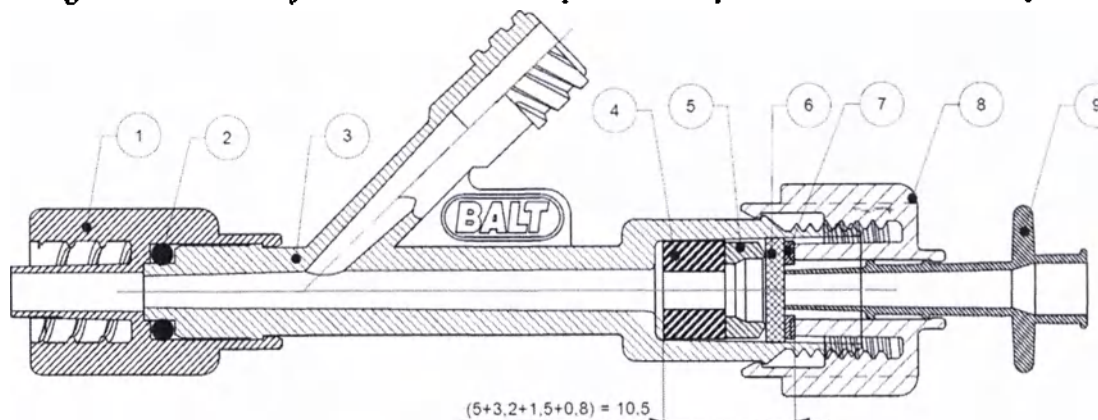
Device structure: RYVA.LUER Sterile Disposable Y-Shaped Connector with Two Adapters (1. Rotating male Luer lock; 2. O-ring; 3. Shaft; 4. Retainer; 5. Molded retainer clamp; 6. Valve; 7. Molded ring; 8. Valve clamp; 9. Valve gasket).
